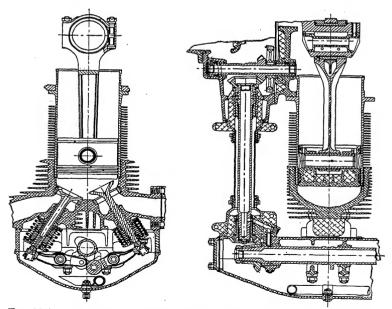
Arrangement of the valve gear used on the Ranger inverted aircooled engines.
